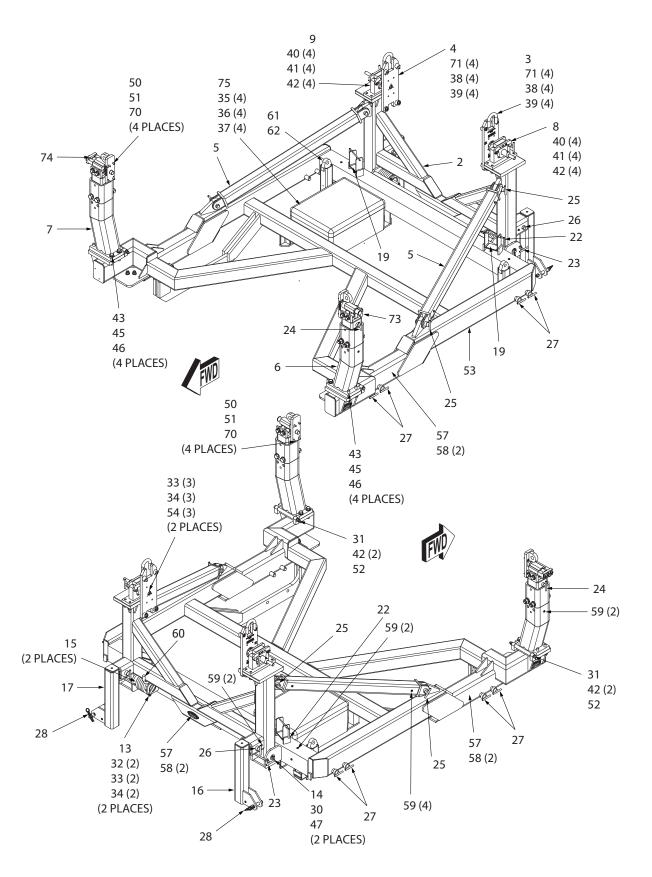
AGSE-E26202-S03 Cradle Assembly
